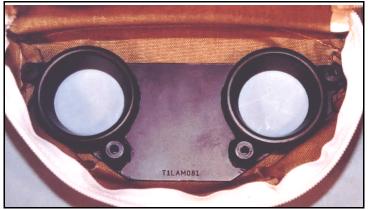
Internal Mounting Weld assembly positioned properly inside of bag
